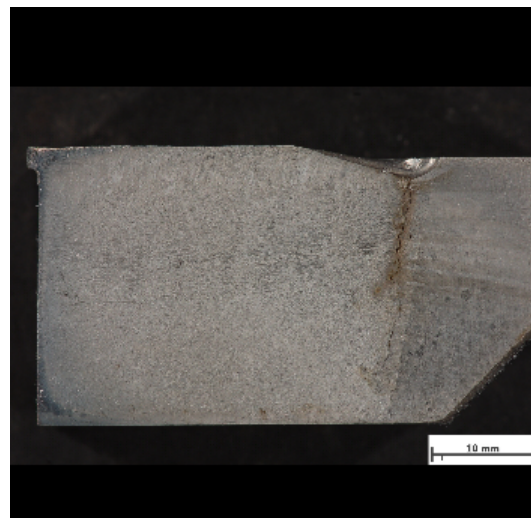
WTP,blind weld H [Adler]:longitudinal cut, besides the end-crater crack the overall quality is satisfying
